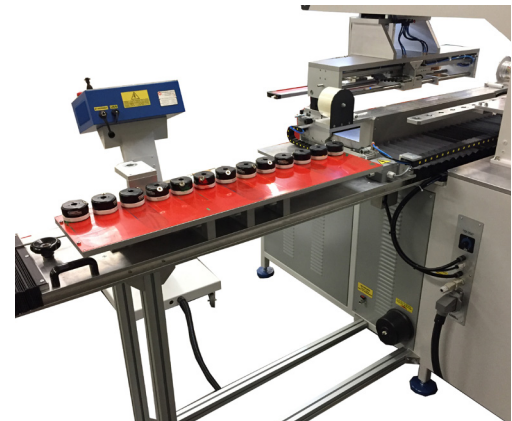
Both cliché supports are mounted to a single sub plate that slides out of the machine on linear guide rails for ease of change over
